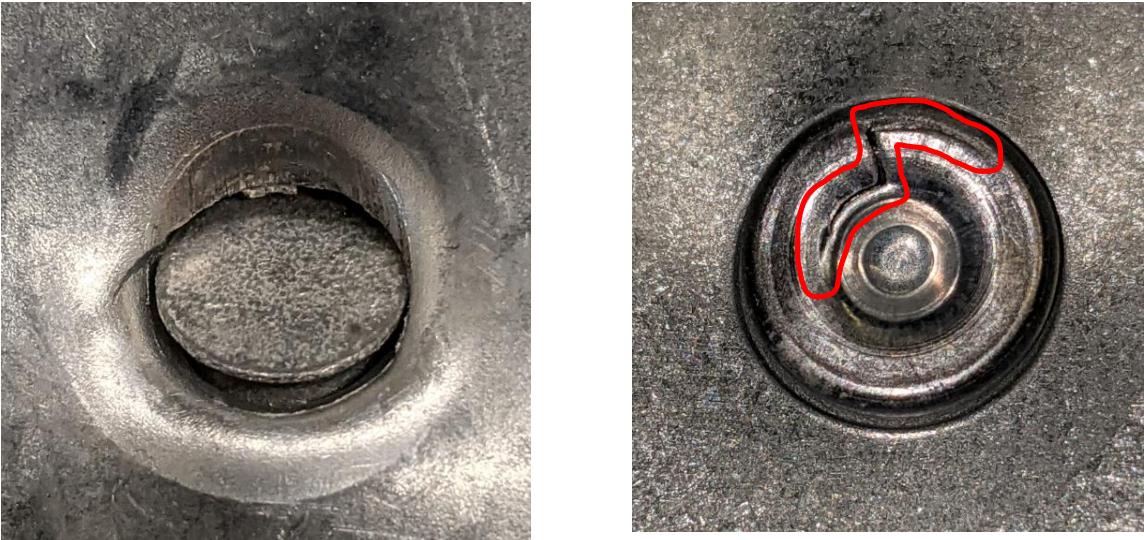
Al 6016 1mm by DX54D 0.95mm SPR cross-tension post quasistatic test 45° pierced Al 6016 sheet (left) and clenched DX54D sheet (right) SPR local damage details
